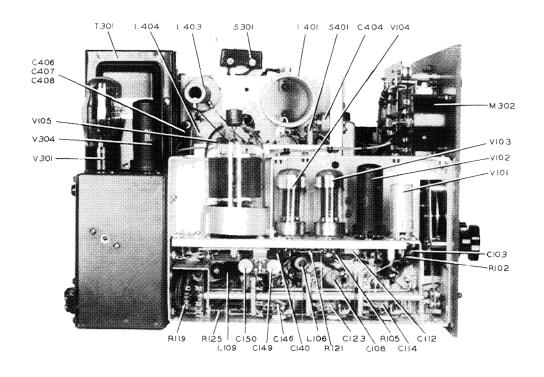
32V-2 PARTS ARRANGEMENT-LEFT SIDE OPEN
